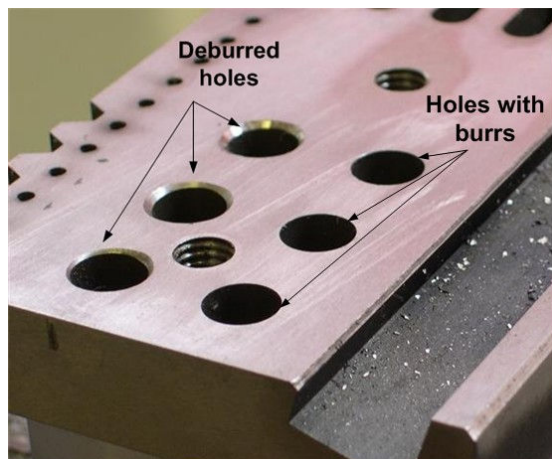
A photograph of holes with burrs and deburred holes on RR1000 test piece
